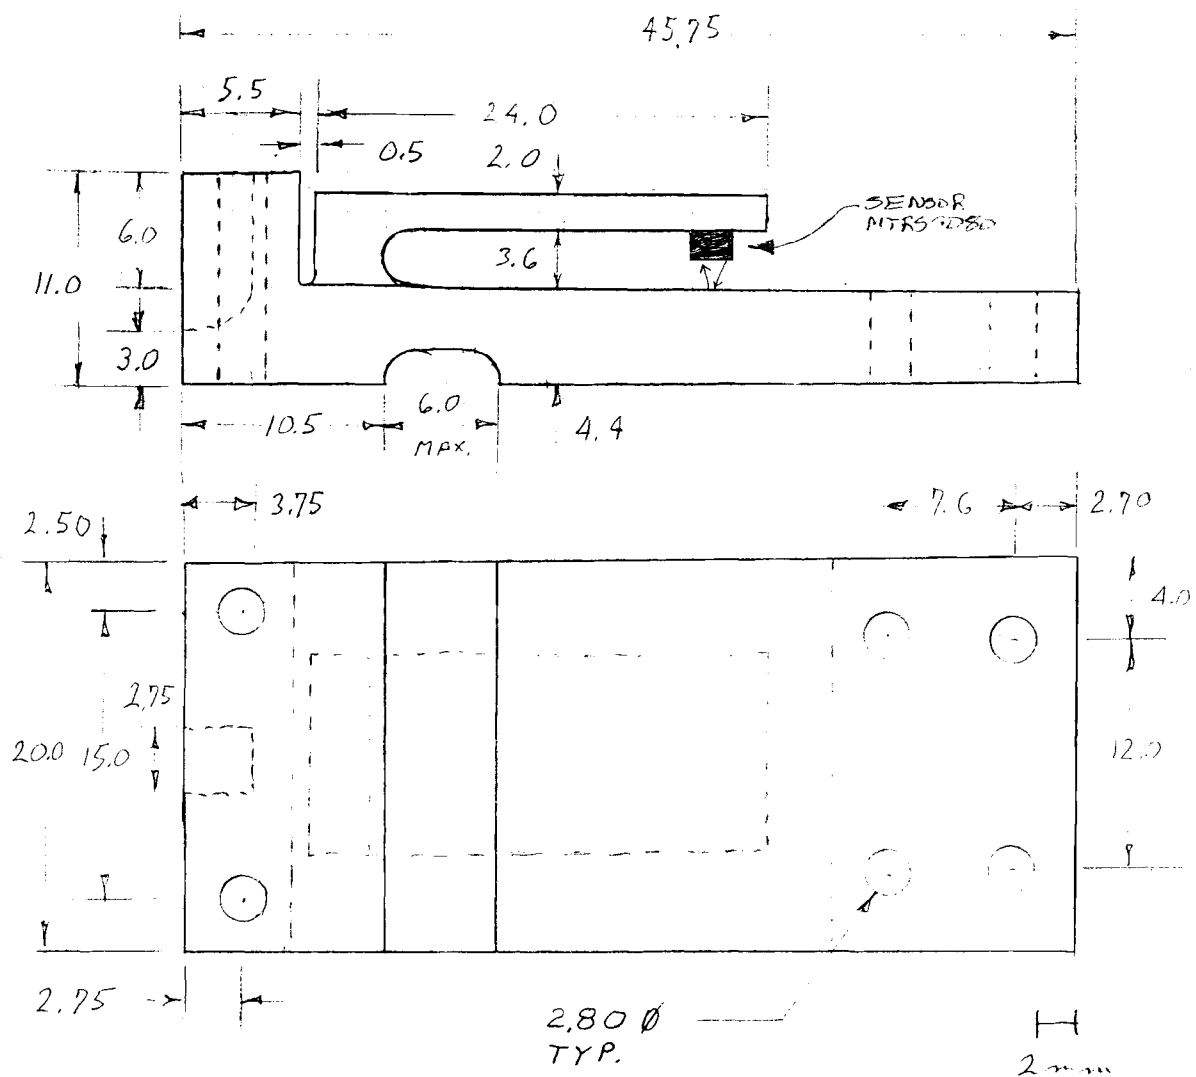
Dimensions of the torque-sensing module developed for joint number 3 of the master controller finger. (Dwg. GC251191-01)
